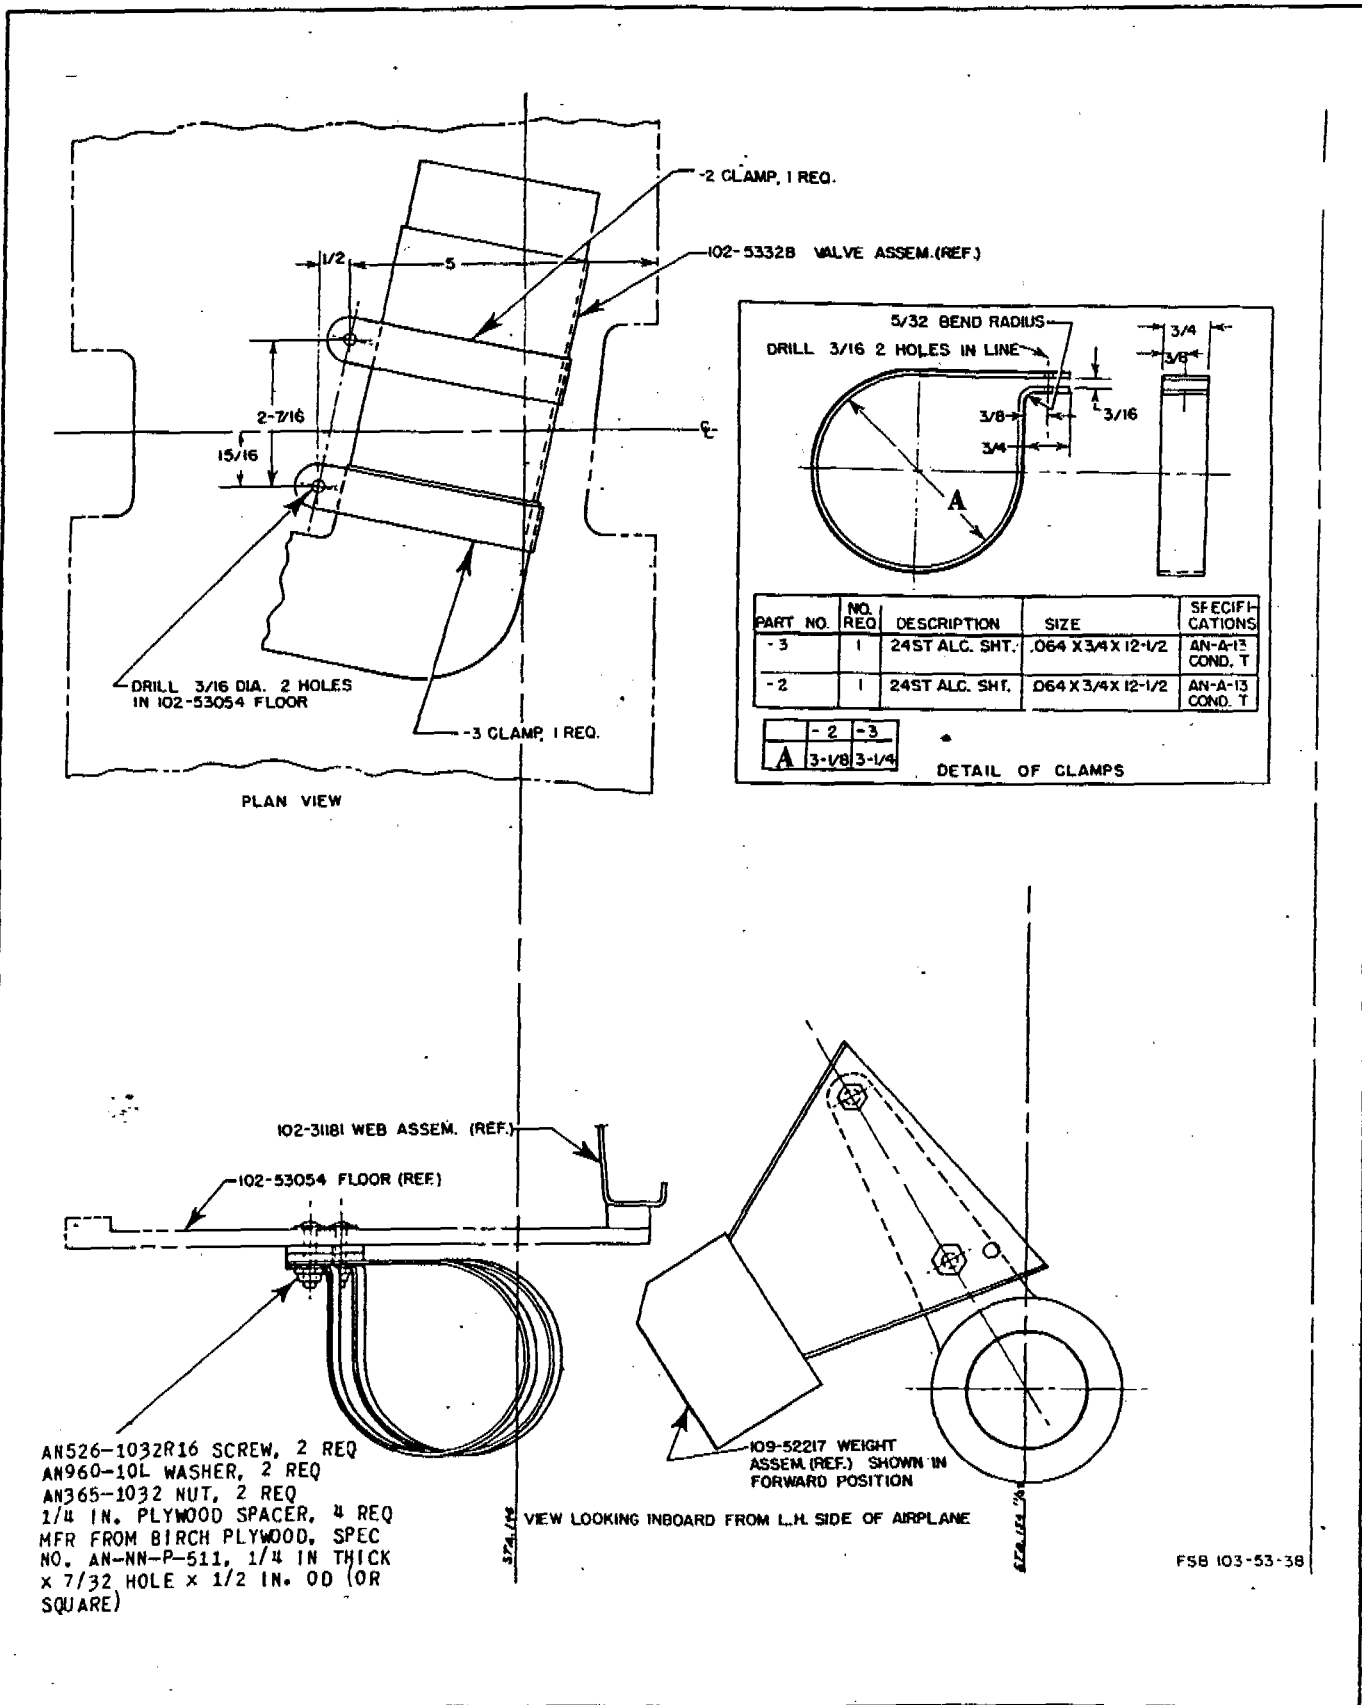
Relocation of Cold Air Control Valve - P-51B and P-51C Airplanes
